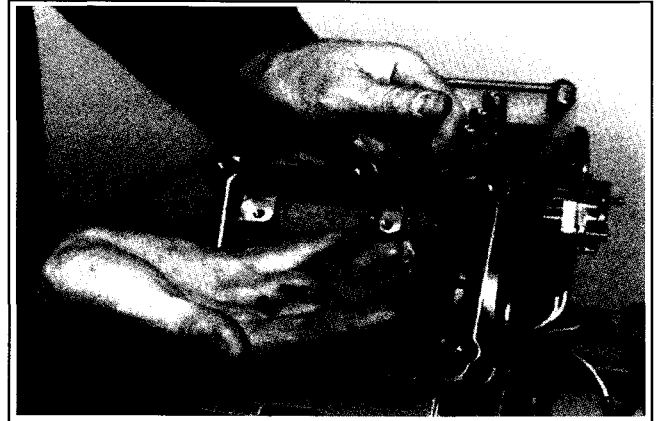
Removing Governor Yoke and Cross Shaft.
